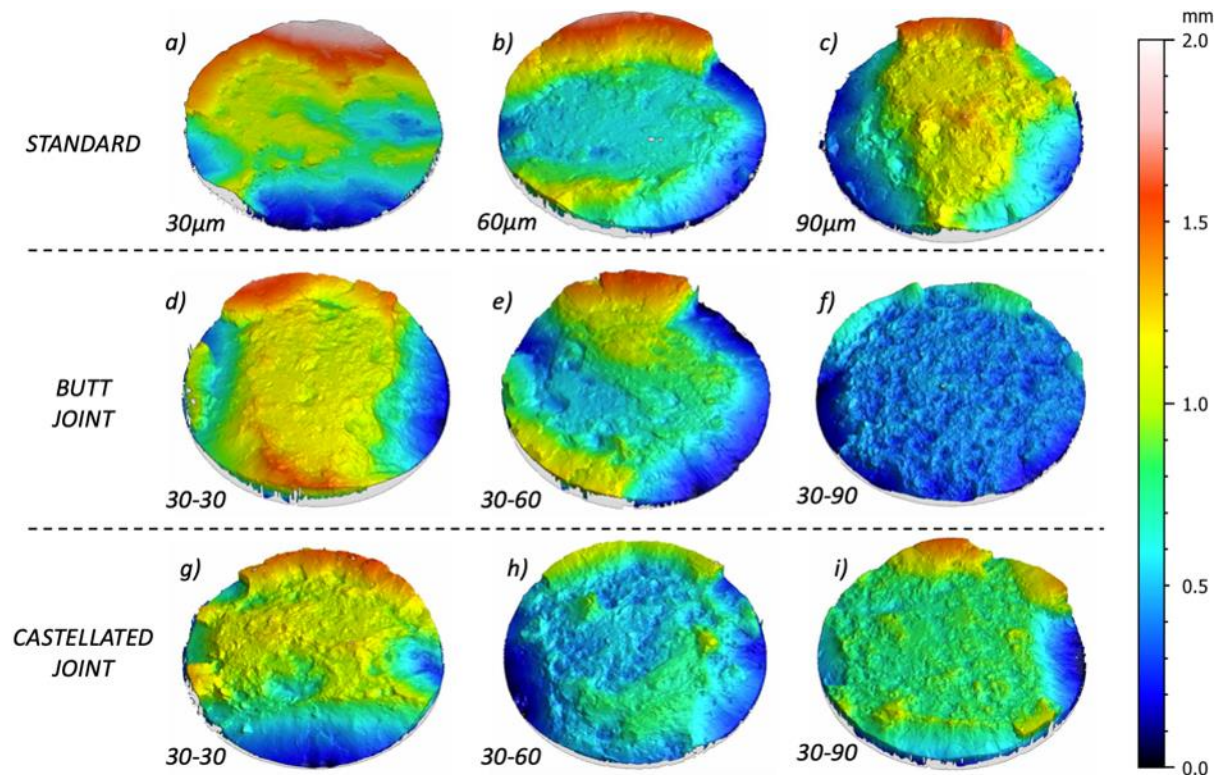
Focus variation images of the fracture surfaces introduced when tensile testing the interlaced layer thickness LPBF specimens to failure; top row (a, b and c) includes baseline samples of singular layer thicknesses 30, 60 and 90 µm respectively; middle row (d, e and f) includes butt jointed layer thickness regions of 30-30, 30-60 and 30-90 µm respectively; bottom row (g, h and i) includes castellated joints between layer thickness regions of 30-30, 30-60, and 30-90 µm respectively.
